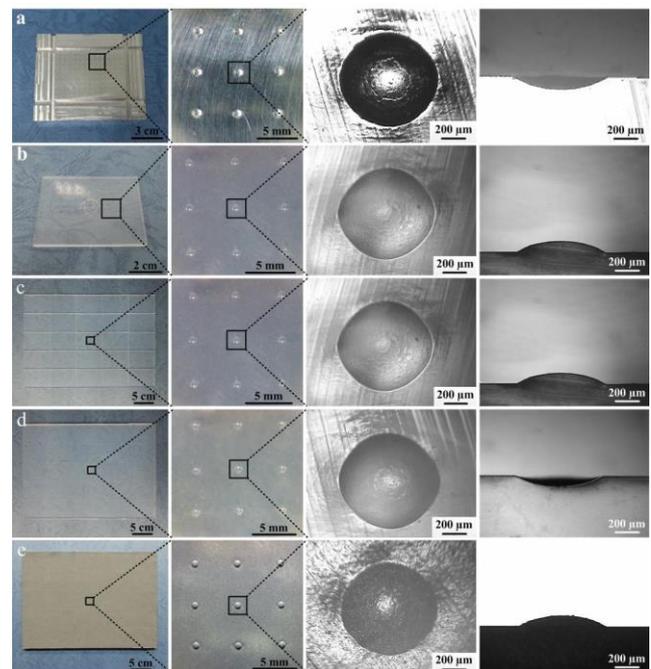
Results of the manufacturing processes of a large-area epoxy resin mold: a–cell mold; b–cell silicone rubber mold; c–a large-area silicone rubber mold; d–a large-area silicone rubber mold with negative shape; e–a large-area epoxy resin mold
